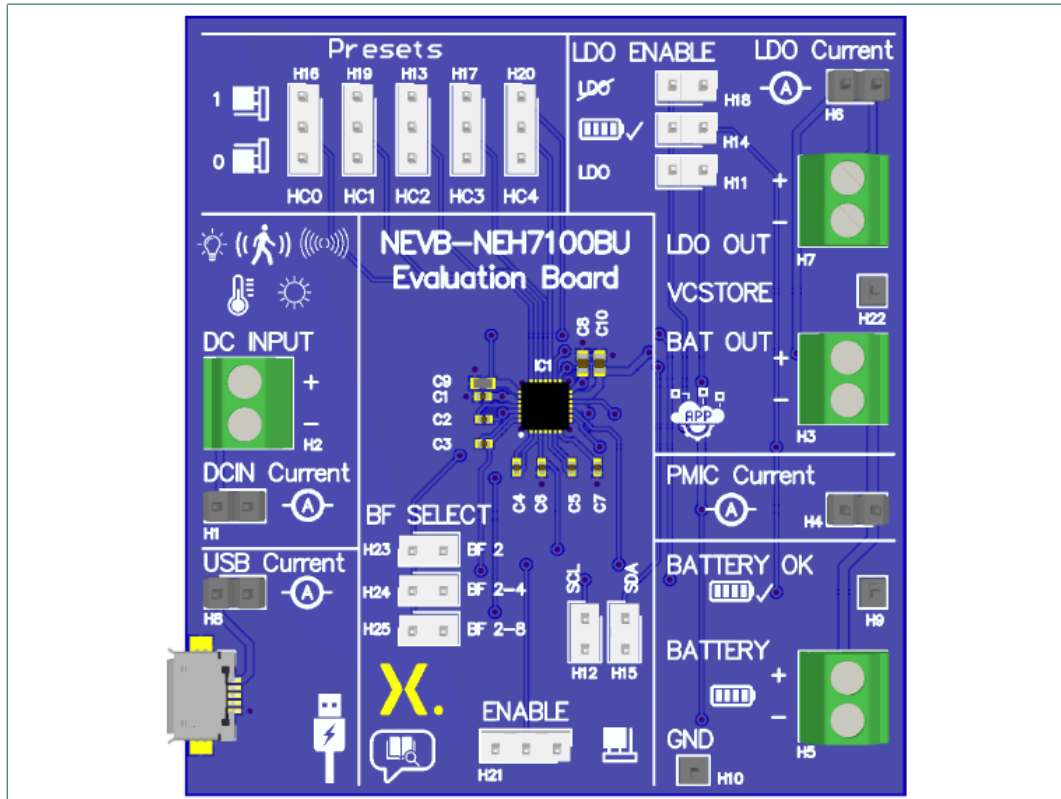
NEVB-NEH7100BU evaluation board PCB top view
